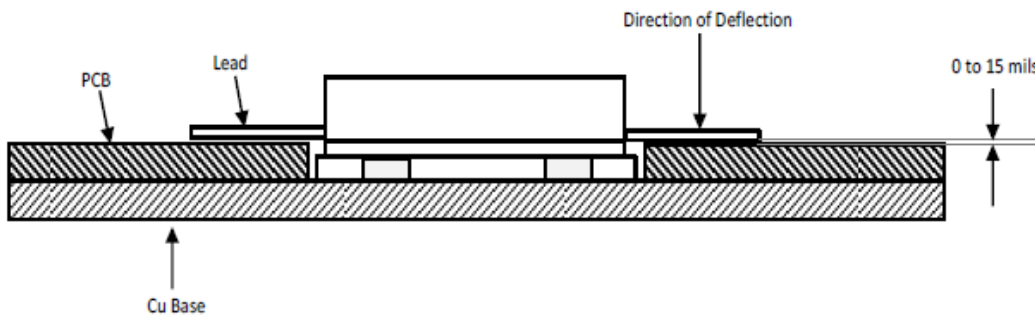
Pocket depth of the cavity to ensure 0 – 15 mils spacing between lead underside and PCB top.
